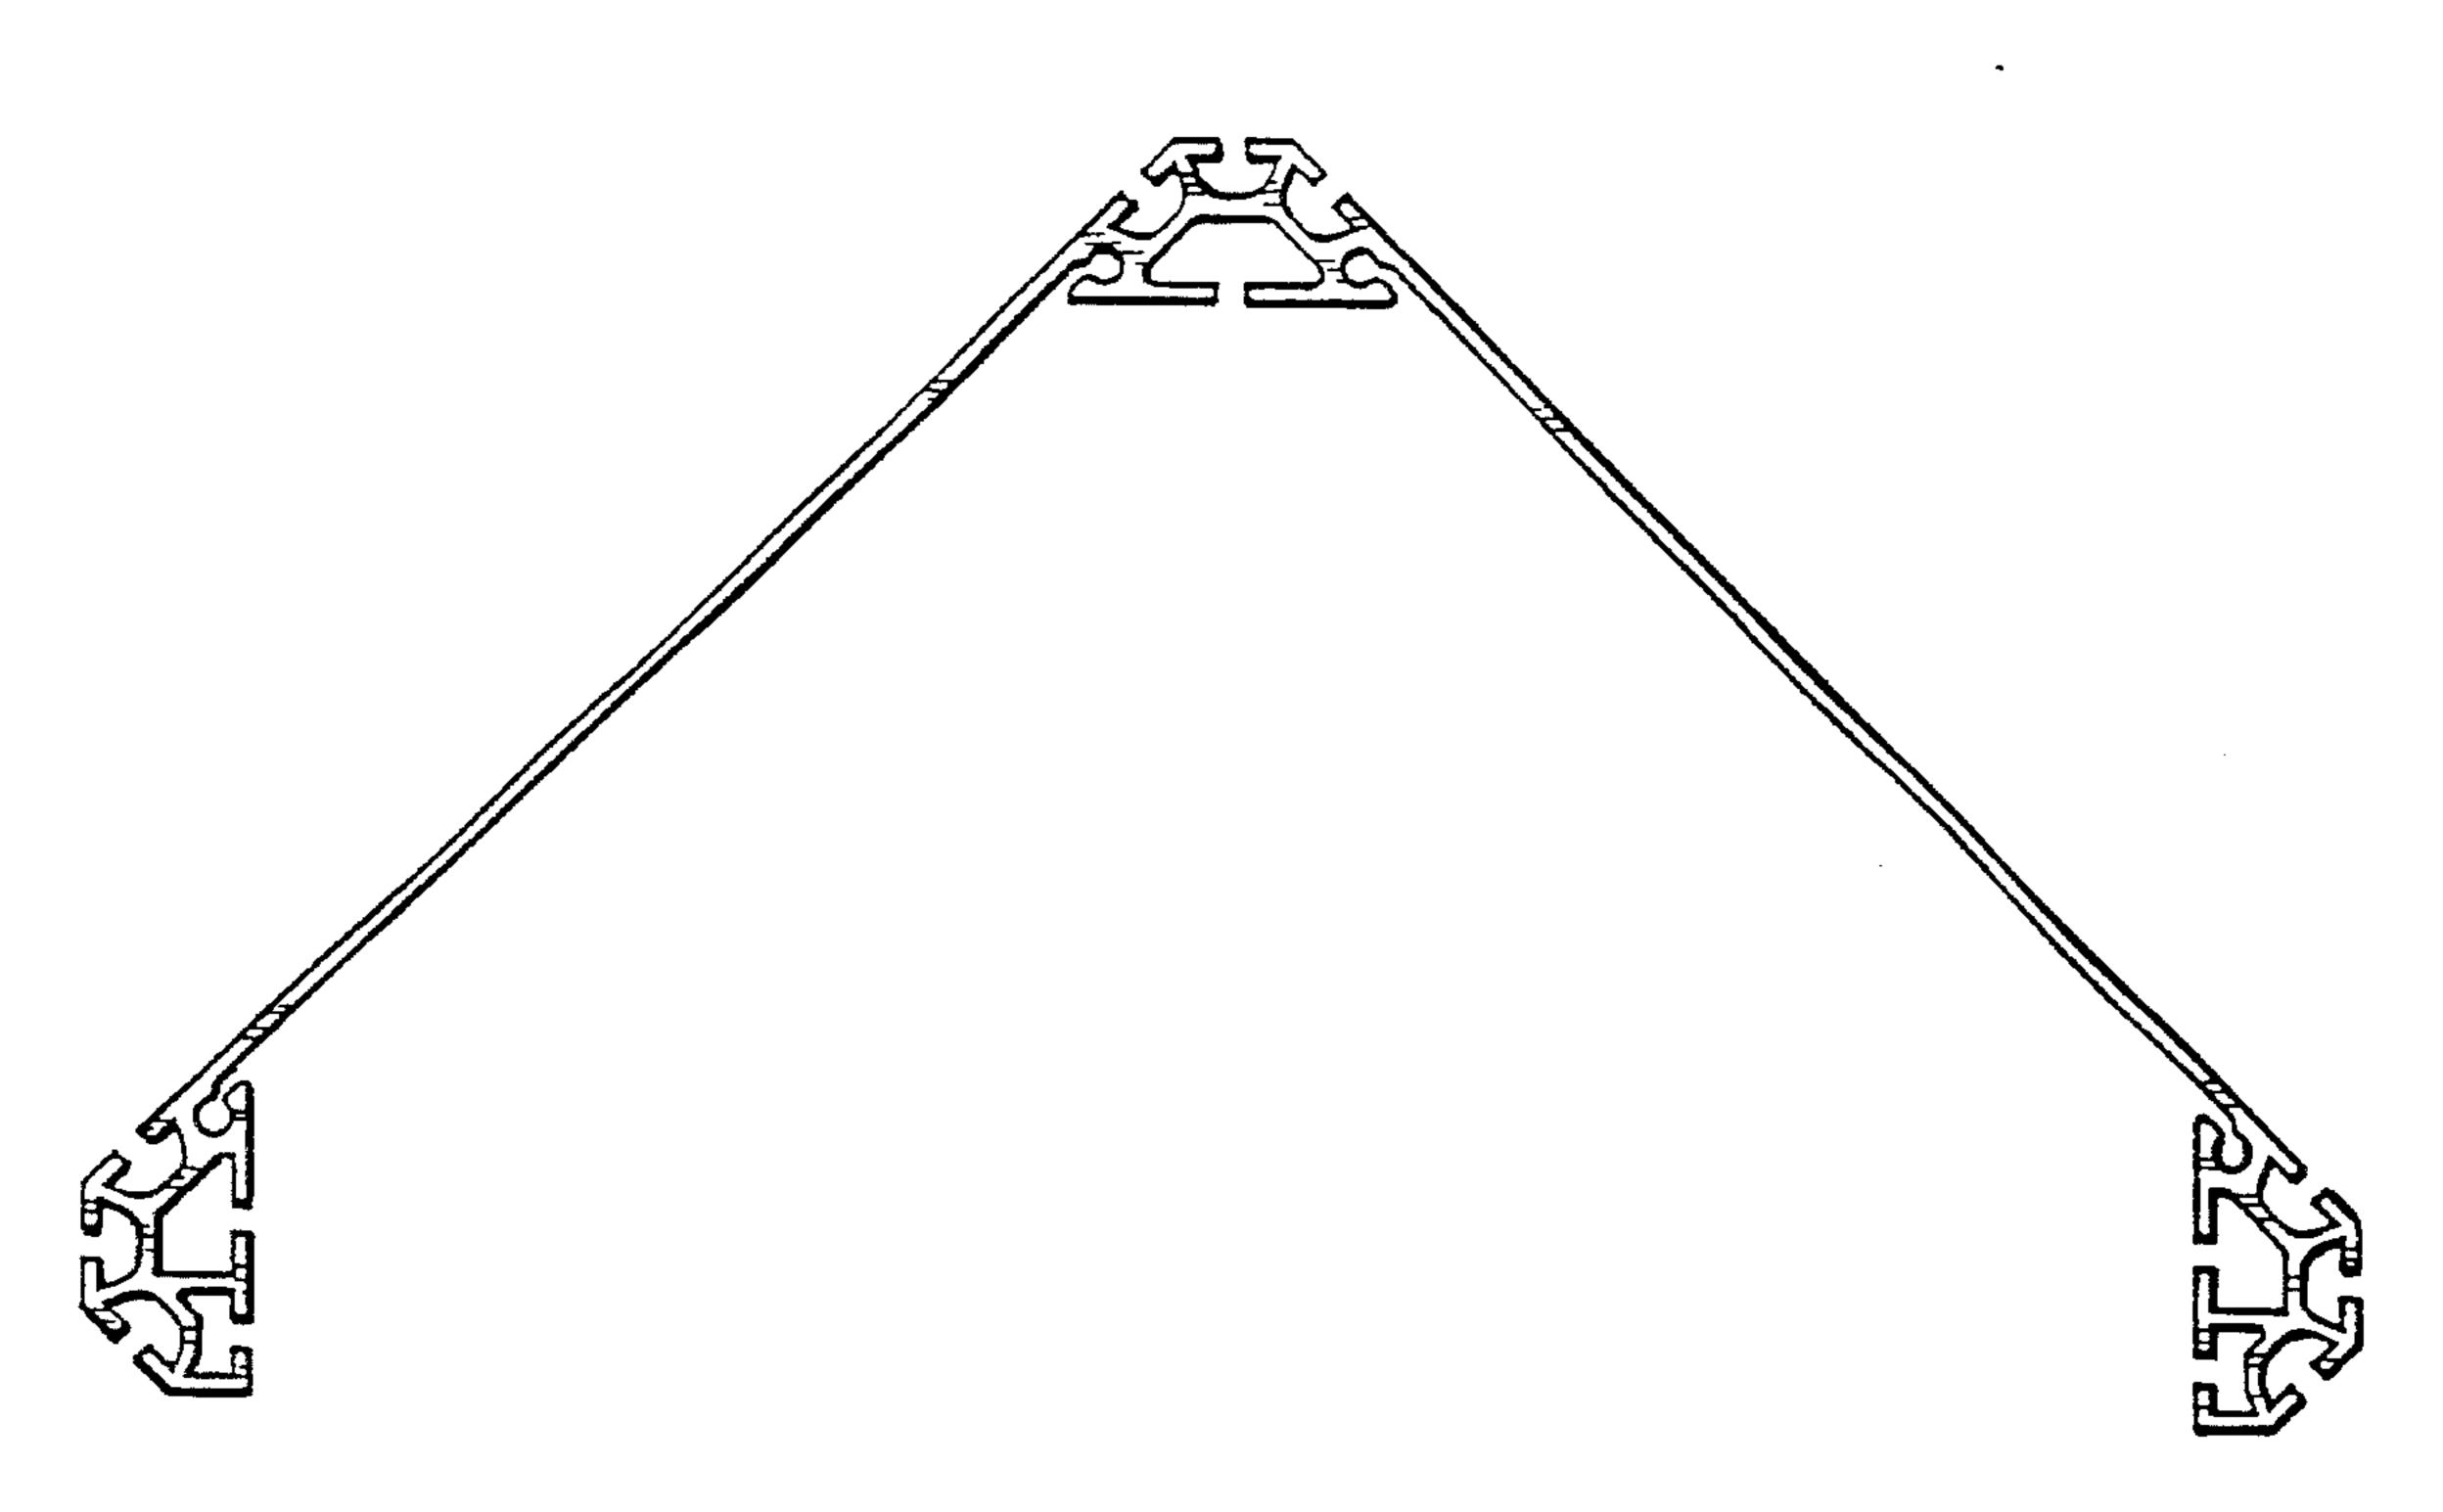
is an end view of a sixth preferred embodiment of a lighting support of constant cross section according to my novel design;
